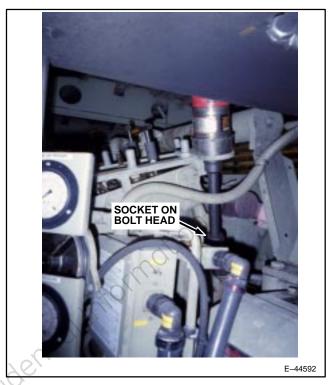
Positioning Air Motor, Extension And Socket On Bolt Head.
